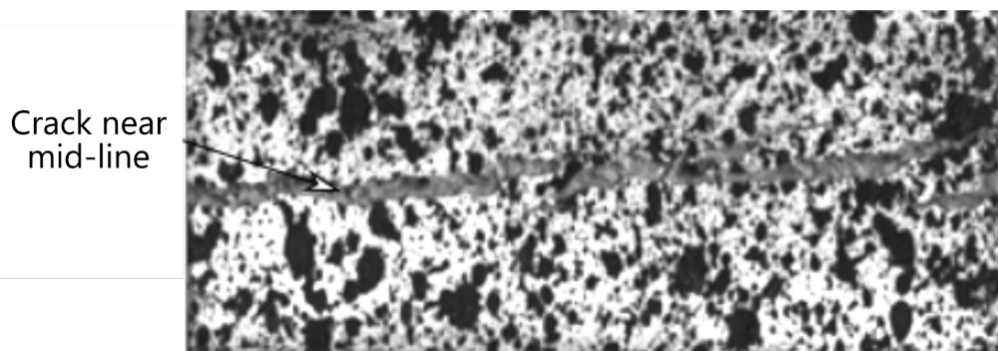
Photograph showing cracking failure of a through-thickness tensile test specimen
